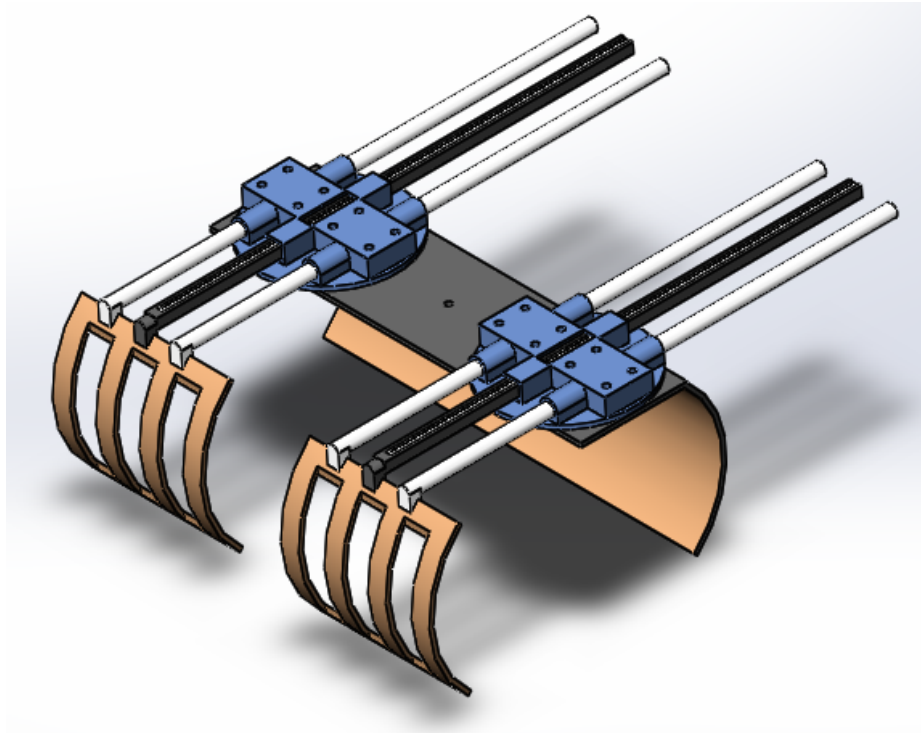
First prototype 3D-drawing of gripper 2.
